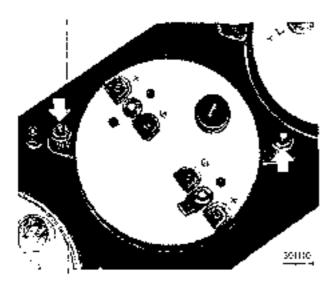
10 Rear View of Temperature Indicator and Fuel Gauge Dash Unit
